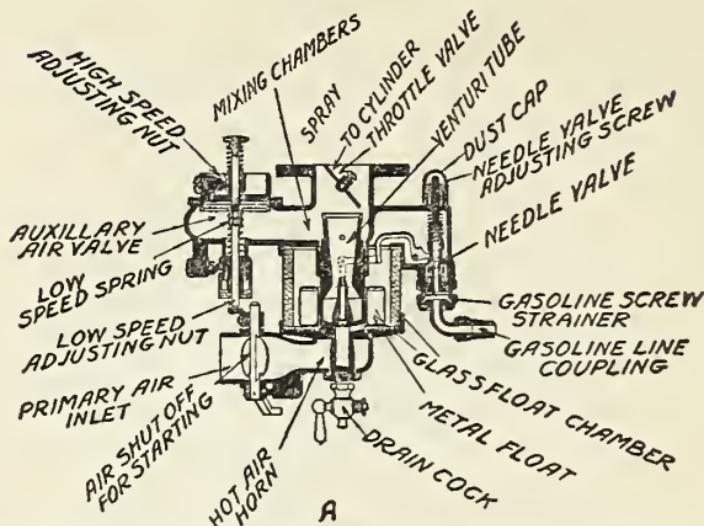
A. Cross section view of a Stromberg carburetor.
